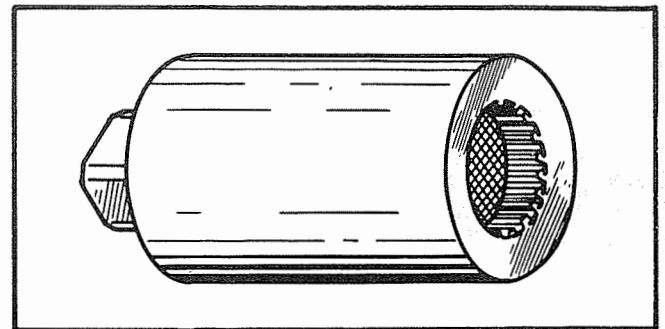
Fuel Injection Tube (in Supercharger Front Housing) Turning Wrench
